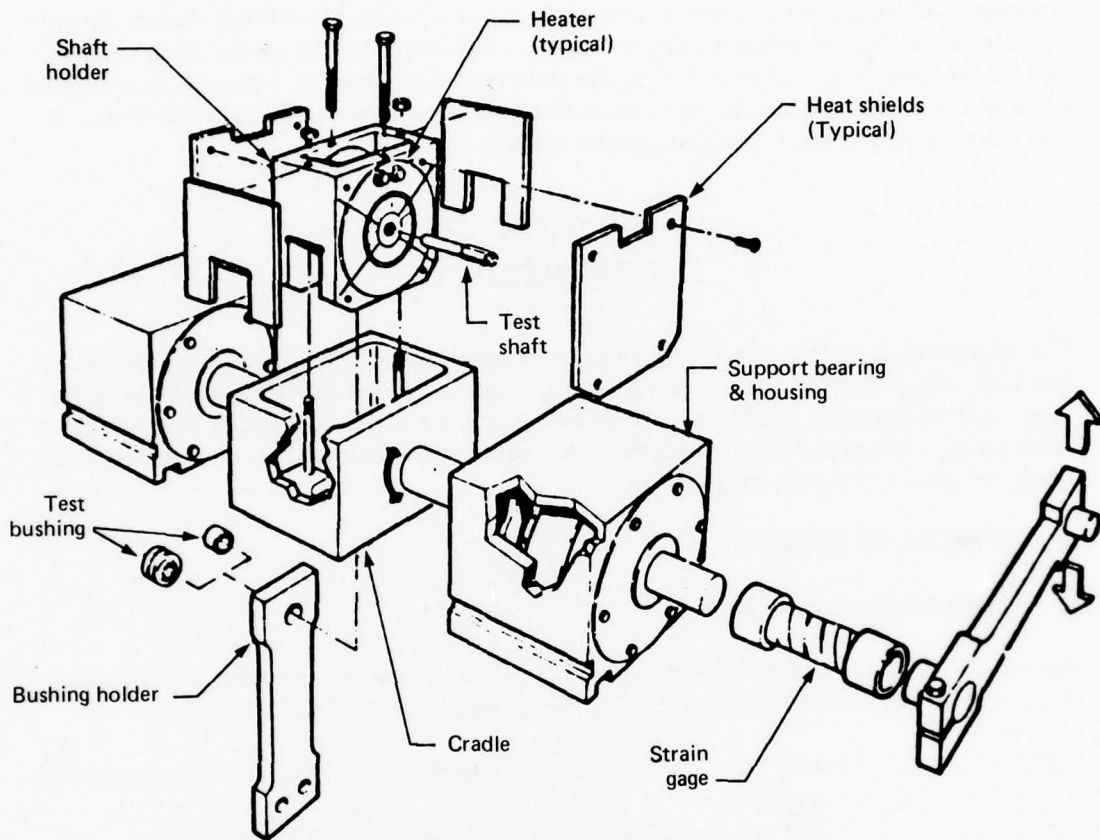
30,000 Pound Plain Bearing Tester (Exploded View)
